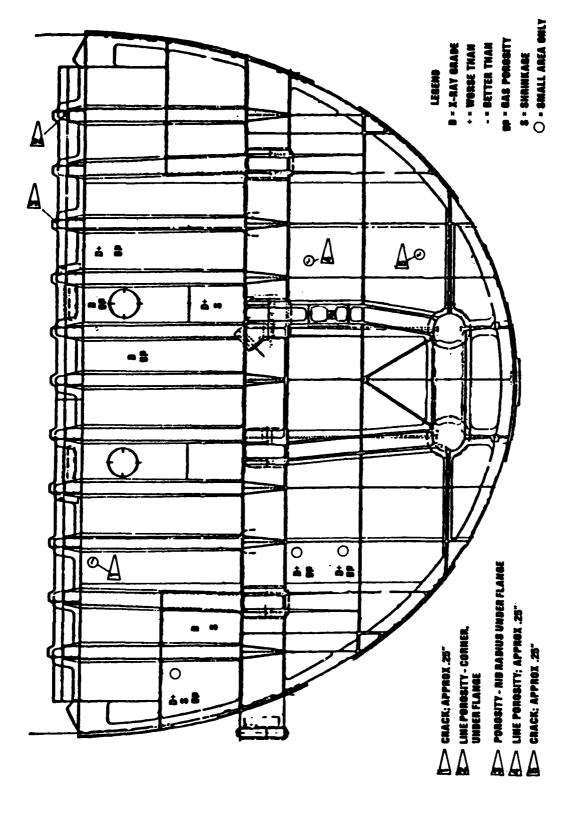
Radiographic and Penetrant Inspection Results - Bulkhead Casting M07
